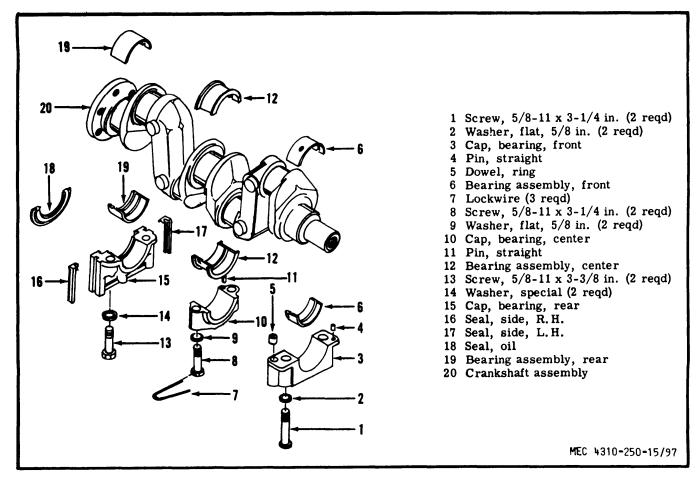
Engine Main Bearings and Crankshaft, Disassembly and Reassembly.
